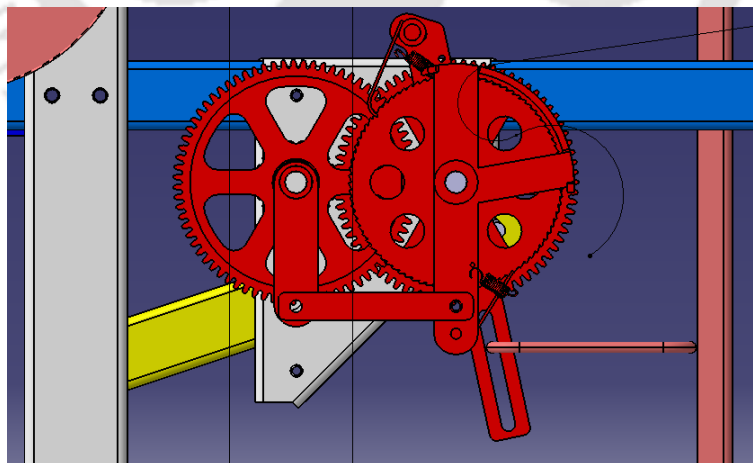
Front view of 5-wheel gear mechanism design in beta model
